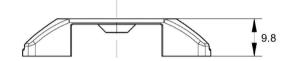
Dimension drawing of spacer 6GT2690-0AG00
